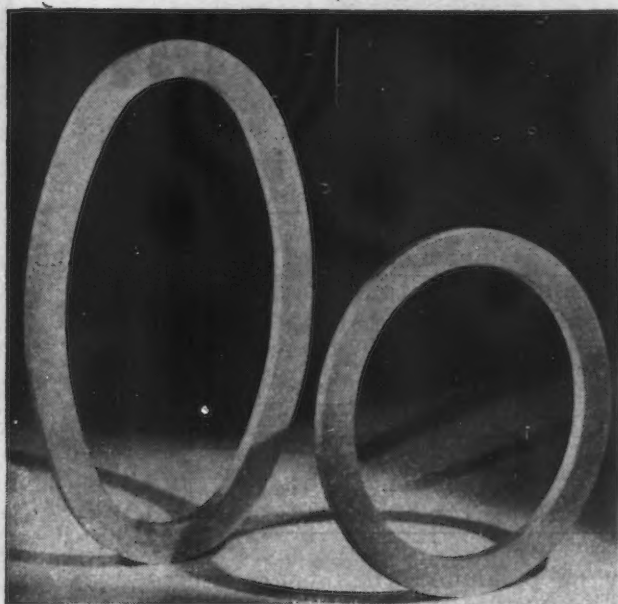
These supercharger flange rings were flash welded, sized, and delivered at a finished price about equal to the raw material cost under the previous blanking methods. Left: Inlet, 8 1/4 in. maj ID x 4 1/2 in. min ID x 23/32 in. face x 9/32 in. thick. Right: Exhaust, 6 15/16 in. OD x 5 3/32 in. ID x 1/4 in. thick.
